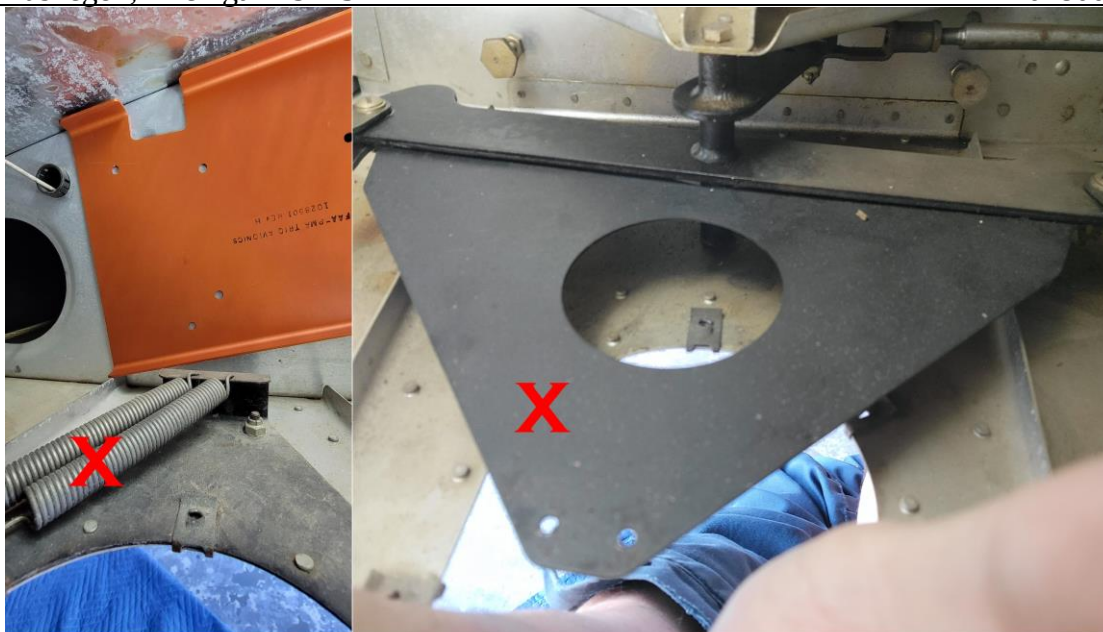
AILERON CENTERING MECHANISM REMOVAL
